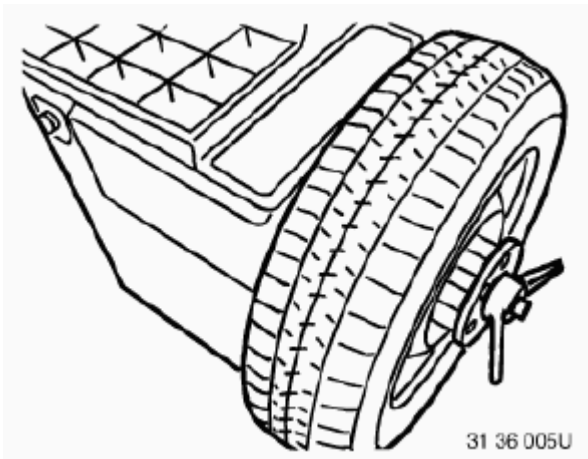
Checking Wheel And Tyre For Radial And Lateral Runout
